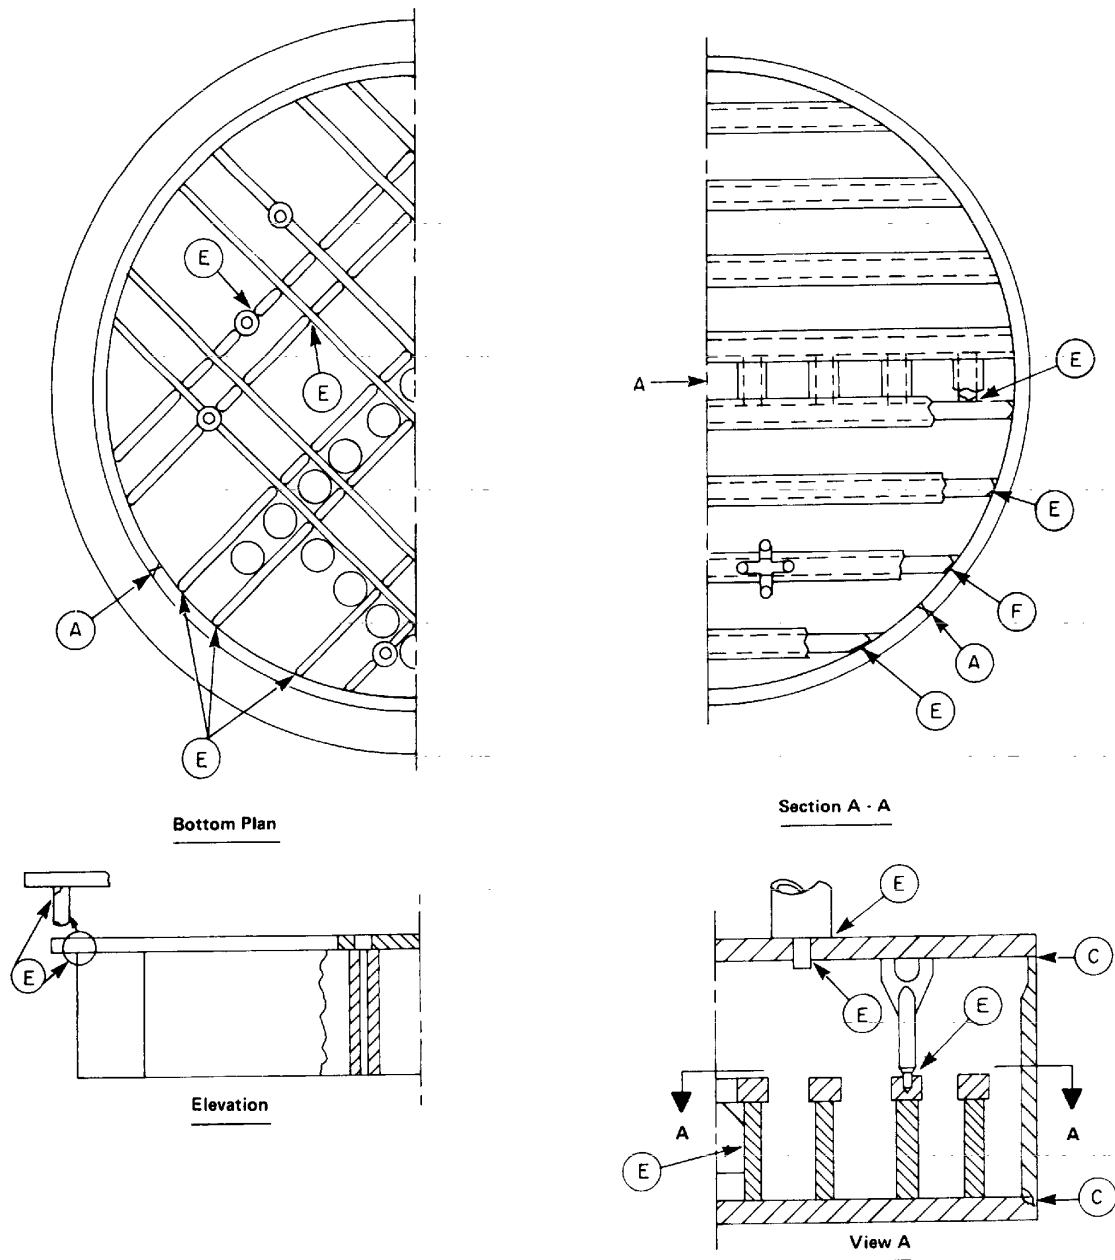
(a)-2 TYPICAL WELDED JOINT CATEGORY LOCATIONS
